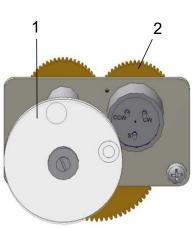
1... mechanical position indicator, 2... wheel turning the potentiometer
